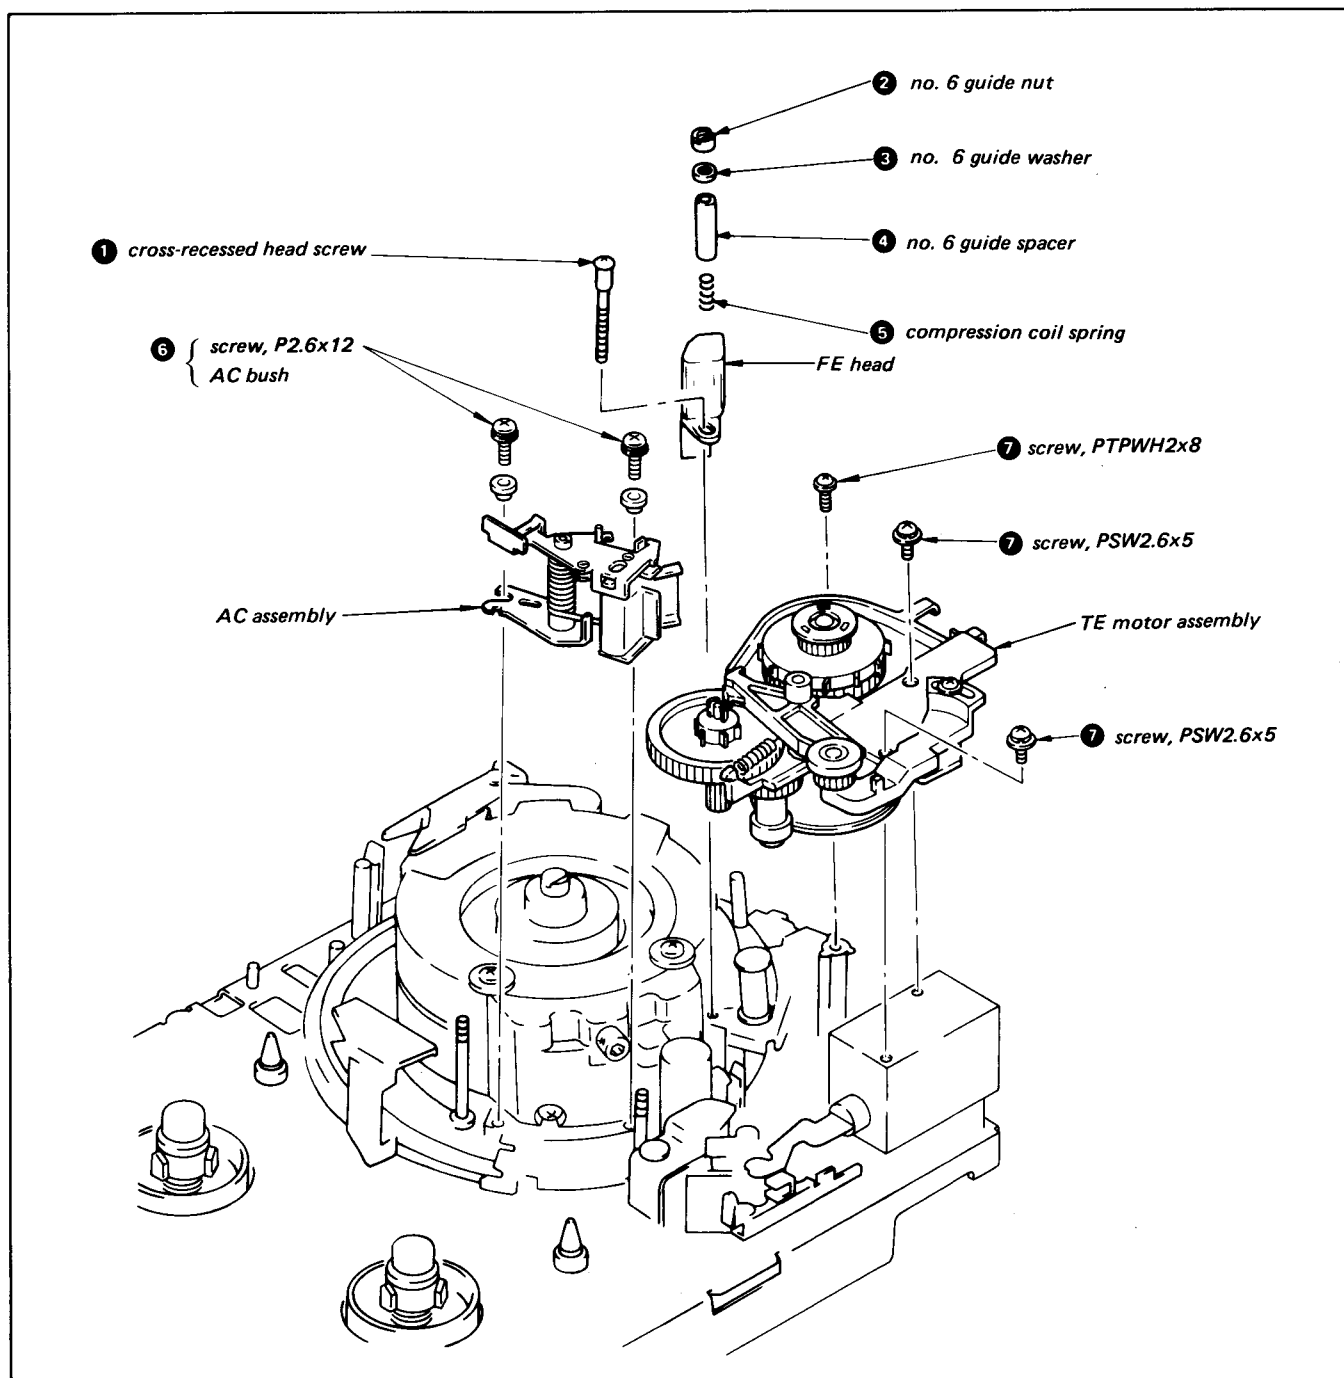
Removal of the AC assembly, FE head and TE motor assembly.
